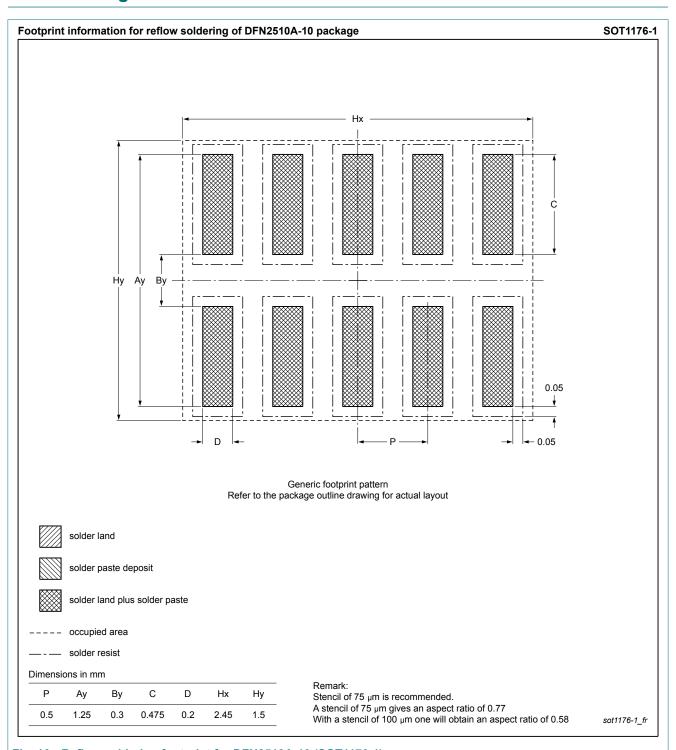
Reflow soldering footprint for DFN2510A-10 (SOT1176-1)
